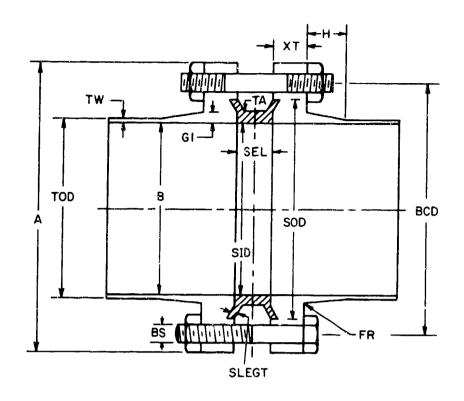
DIMENSIONS FOR CONNECTORS WITH INTEGRAL FLANGES
